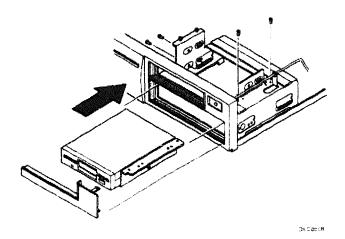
Installing a second 3½-Inch Device (Diskette Drive)
